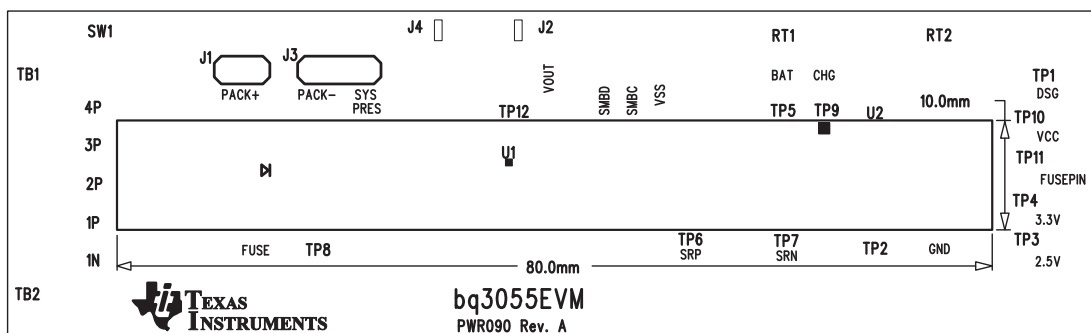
bq3055EVM-001 Layout (Silk Screen)
